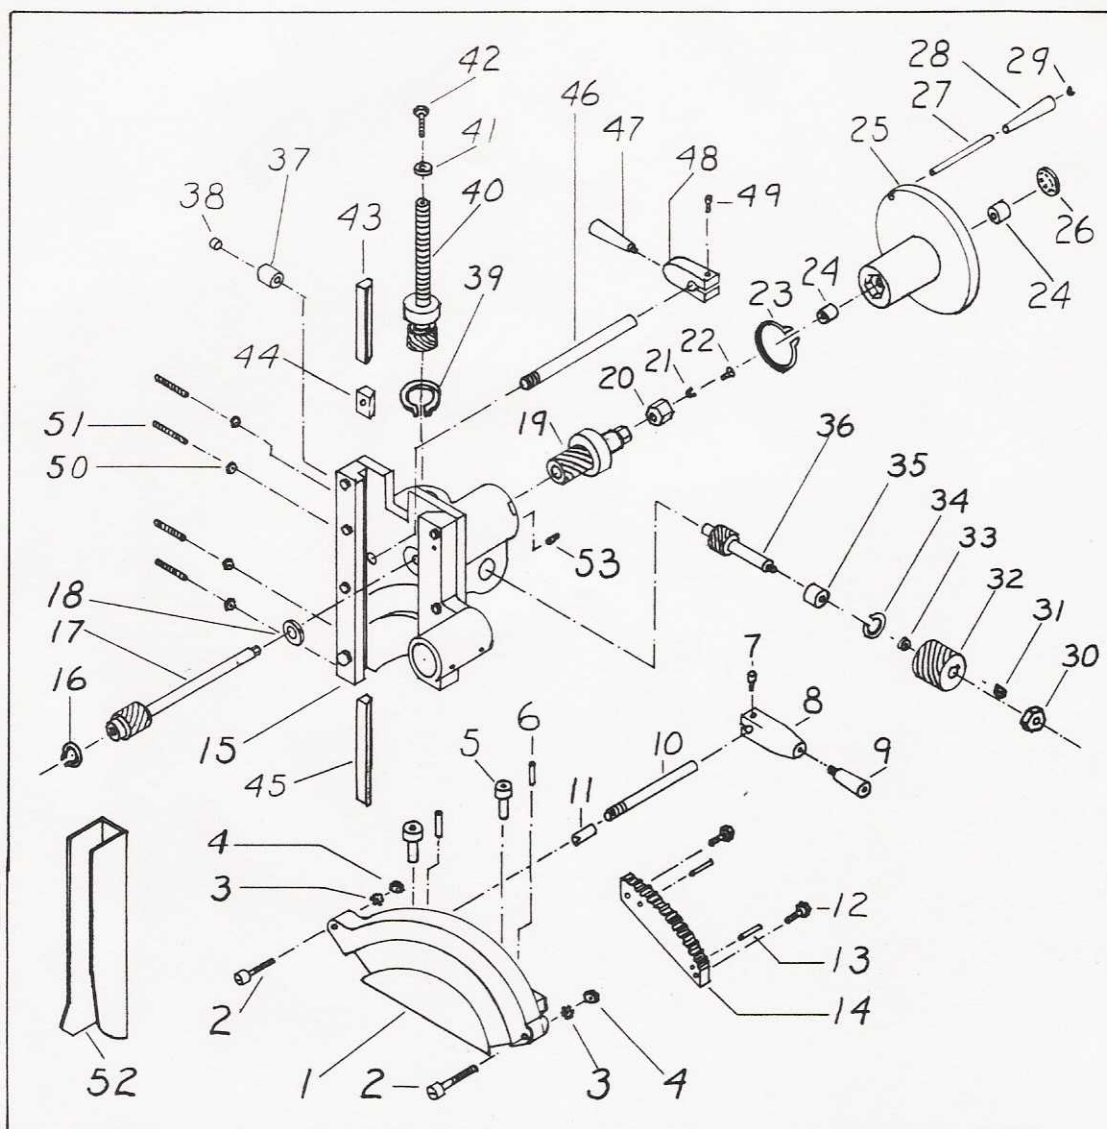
GEARBOX, SLIDEWAY AND TRUNNION ASSEMBLIES
